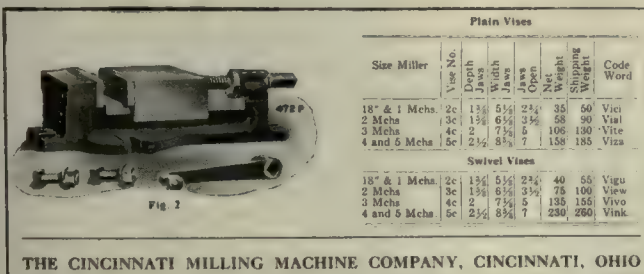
DETAILS OF INFORMATION FOR TOOLING MILLING MACHINES
